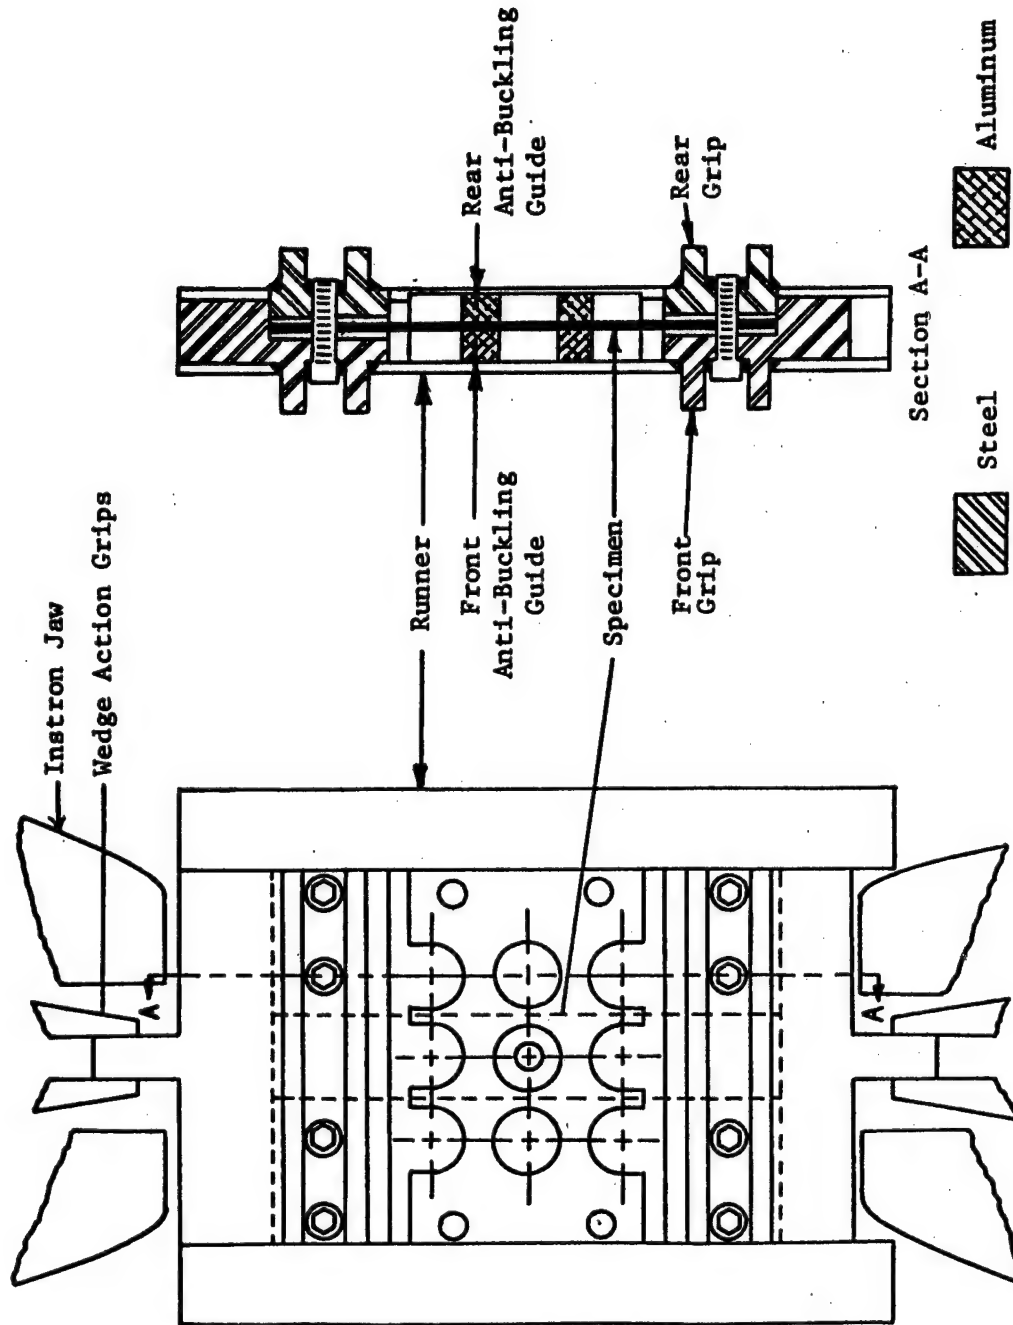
Sectioned Assembly, Specimen Gripping Anti-Buckling Device
